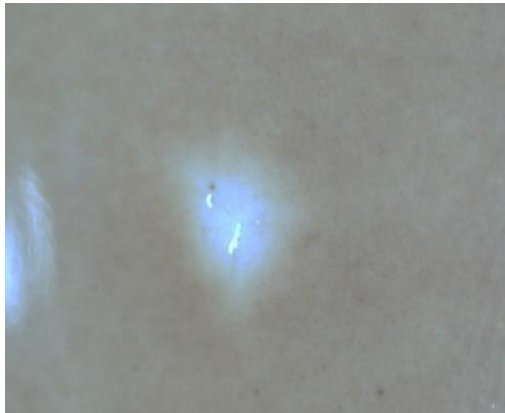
The product surface has cracks in stripes, similar to uncompressed clay.
